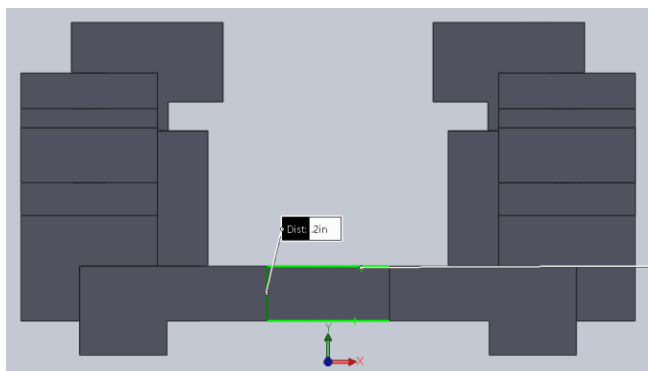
SolidWorks Model Showing Original Height of Motor Fixture Bridge (0.2 Inches)
